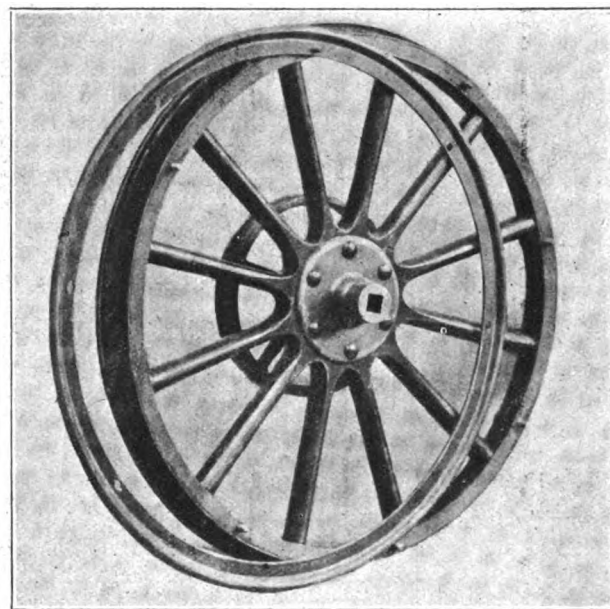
WHEEL WITH FLANGE DETACHED.
